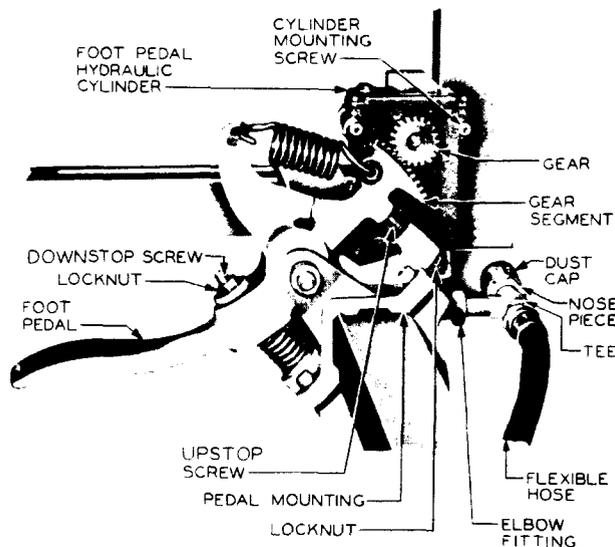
Foot-Pedal Assembly (drip pan and covers removed) — 659A and 659D Tools Only
